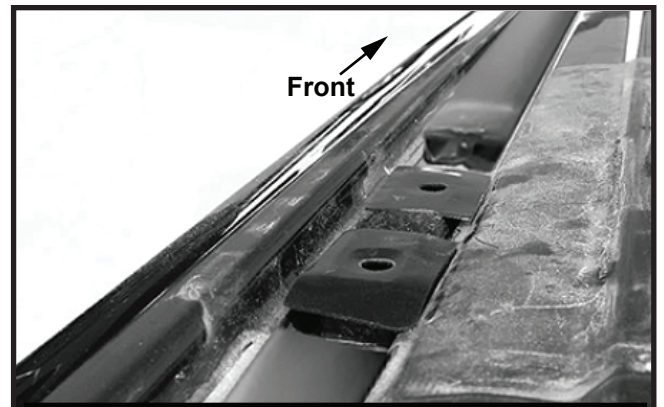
Move to B mounting location with factory installed threaded holes on the top of the vehicle.
